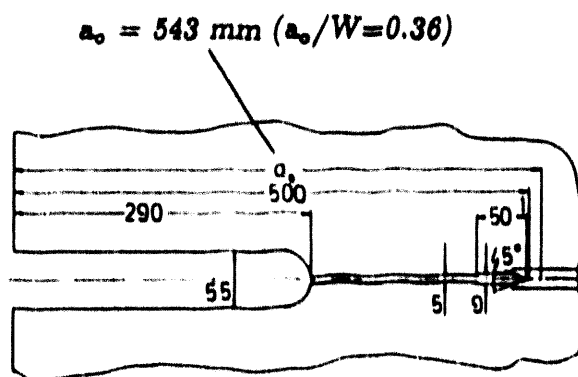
Geometry of the initial crack (part A in Fig. 6)
